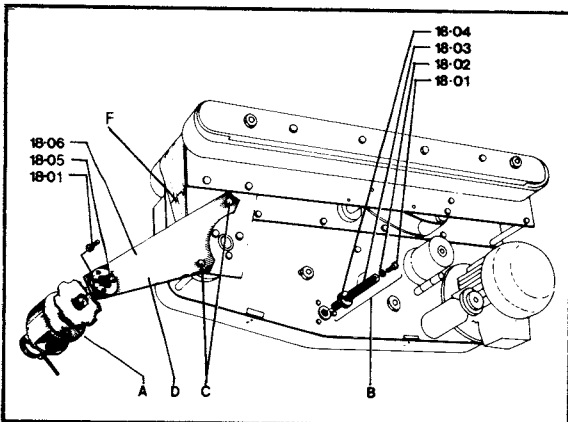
Auxiliary Tape Roll Mount Installation - Left Side View.
